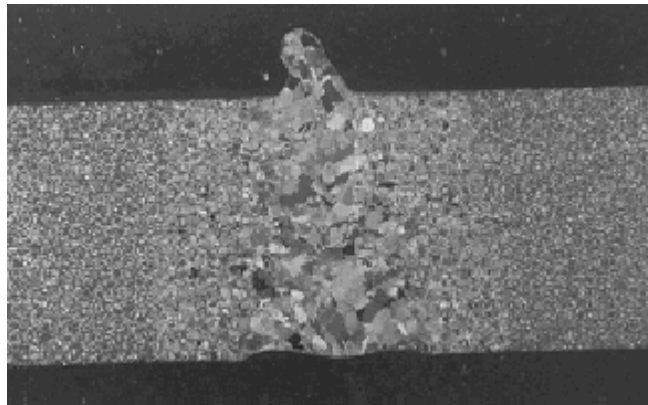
PA welded joint of TiGr-7 alloy (x3.3)
